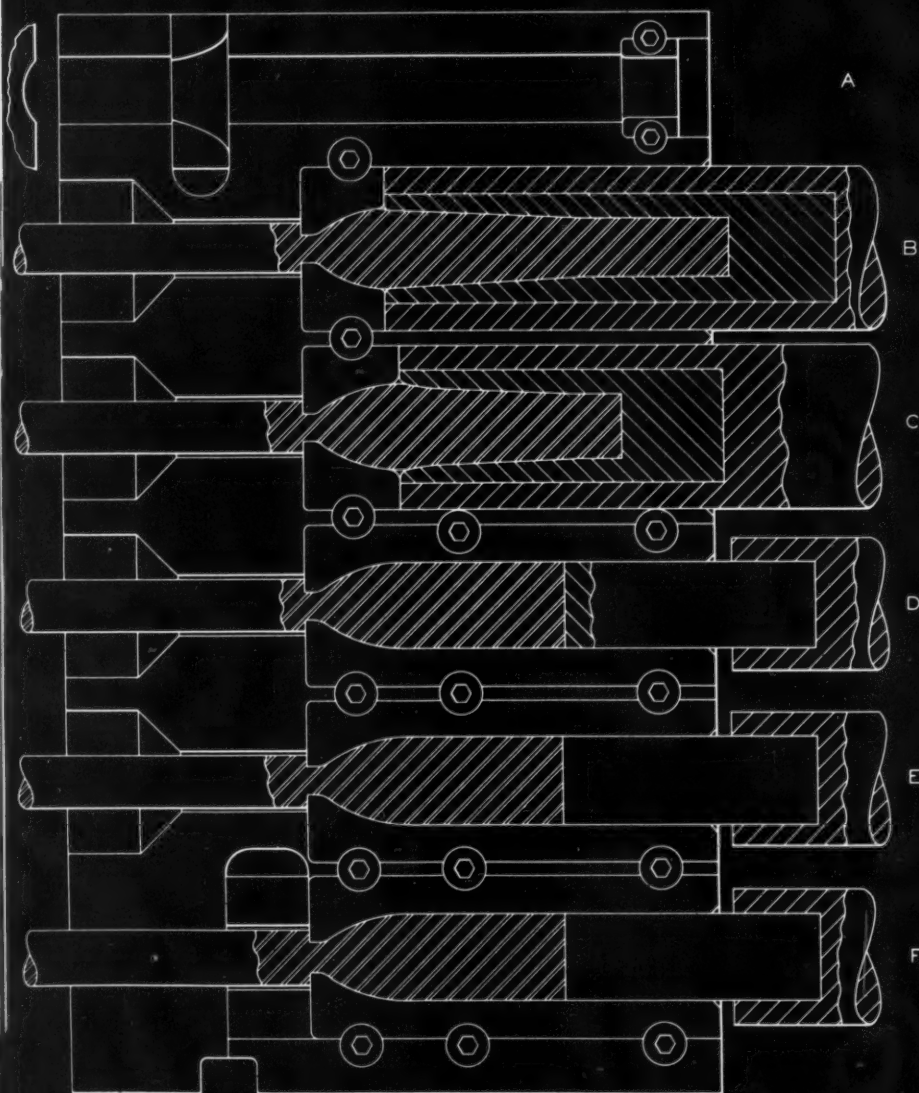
(Left) Drawing of One of the Die Halves, with the Punches Shown in the Working Positions to Illustrate the Successive Steps in the Forging of a Shot Body
